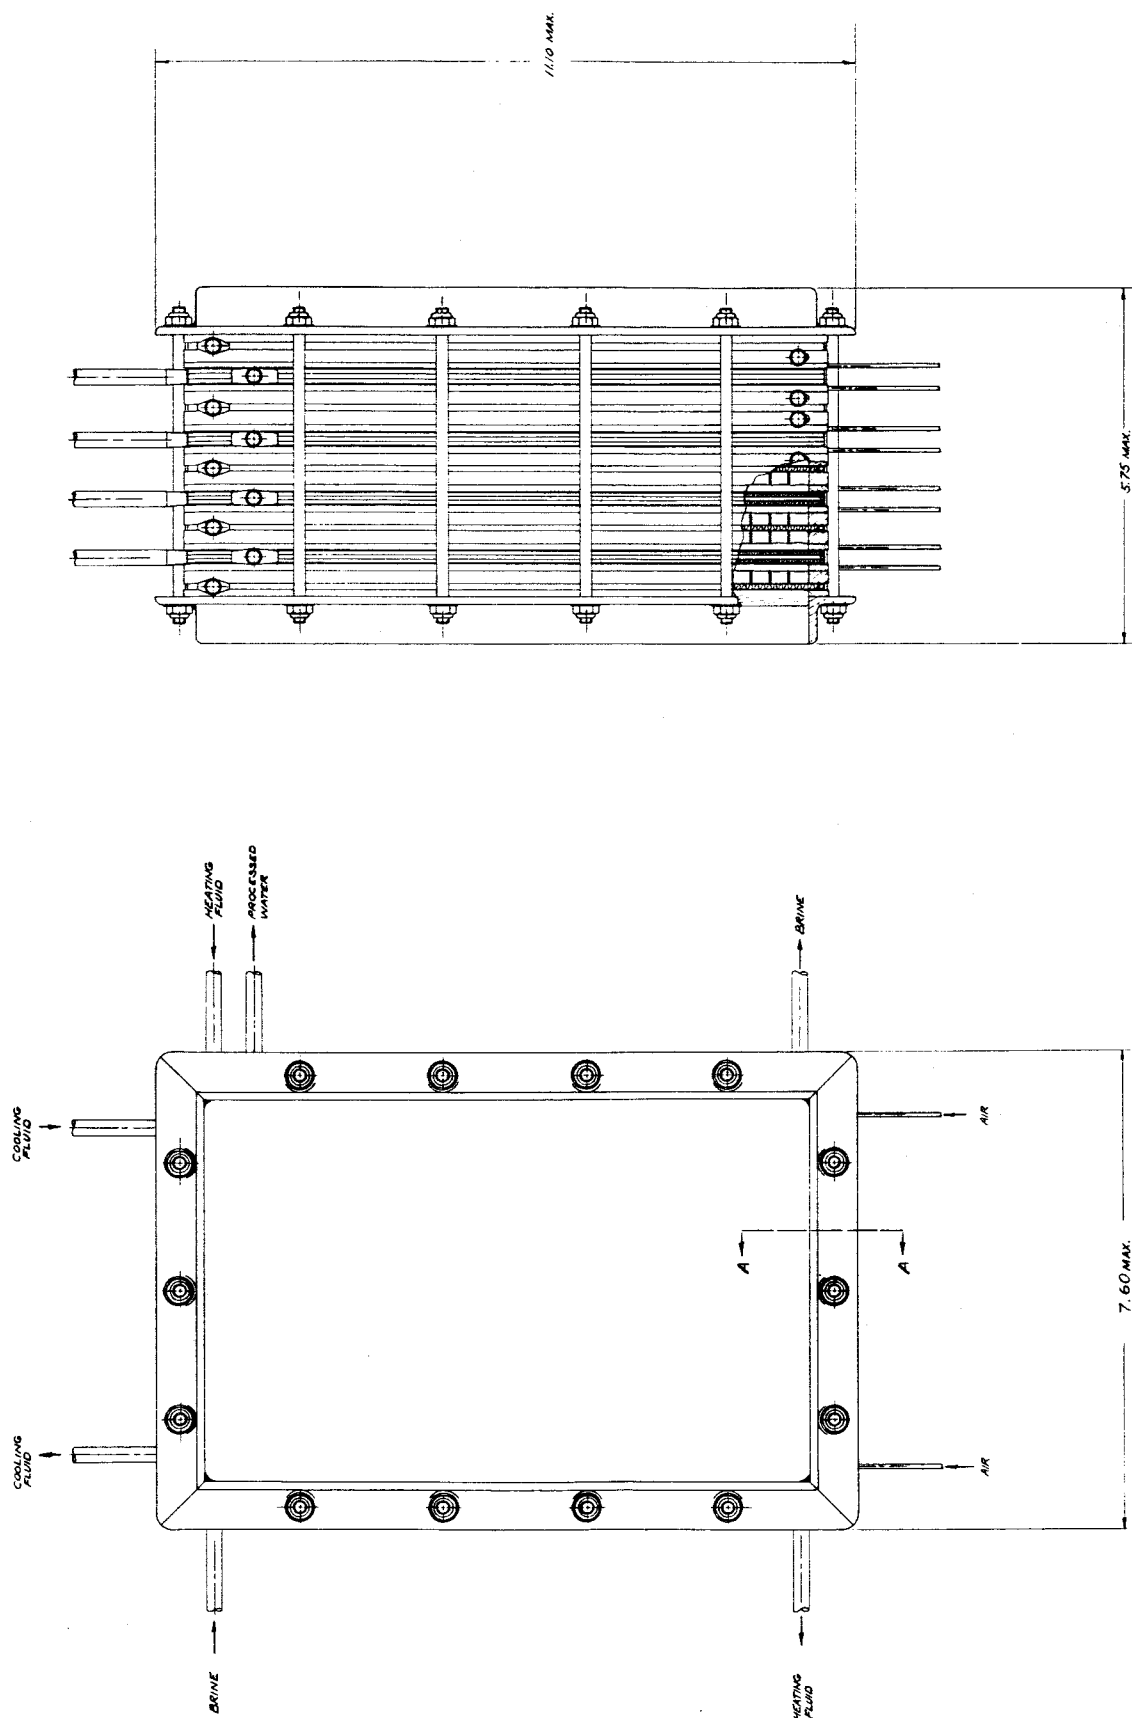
PROTOTYPE DIFFUSION STILL MODULE ASSEMBLY
